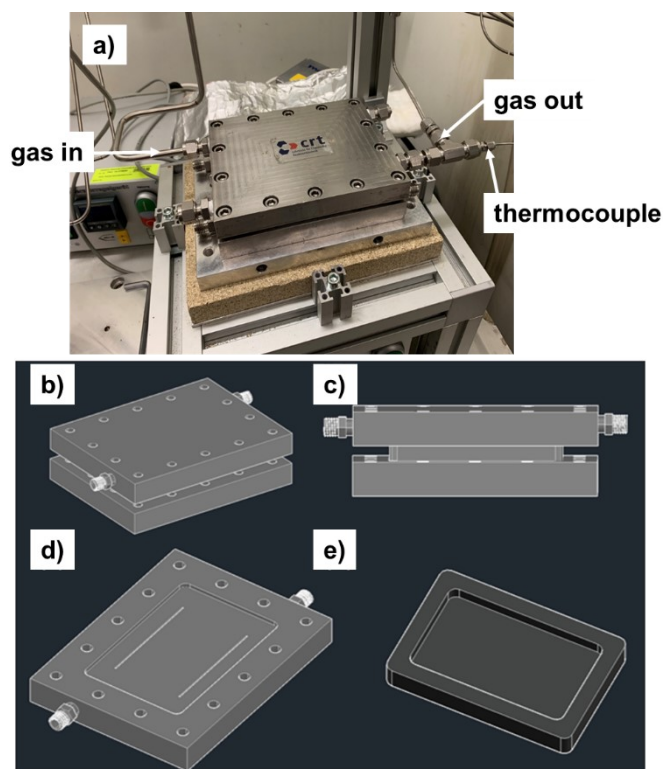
Photographs of a) assembled pool reactor with gas inlet and outlet; b) and c) CAD drawing of assembled reactor parts; d) upper lid and e) pool inlet.
